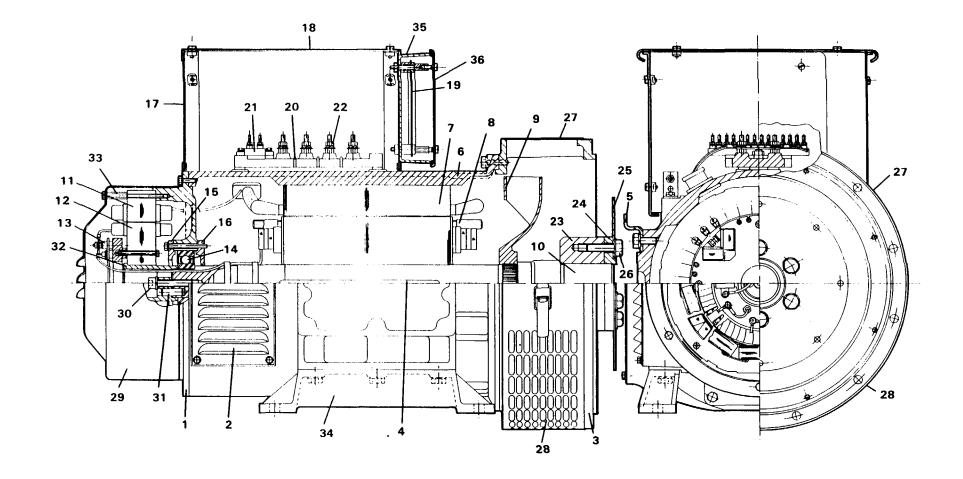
SC1 - 2 SINGLE BEARING MACHINE (OUTBOARD EXCITER)
